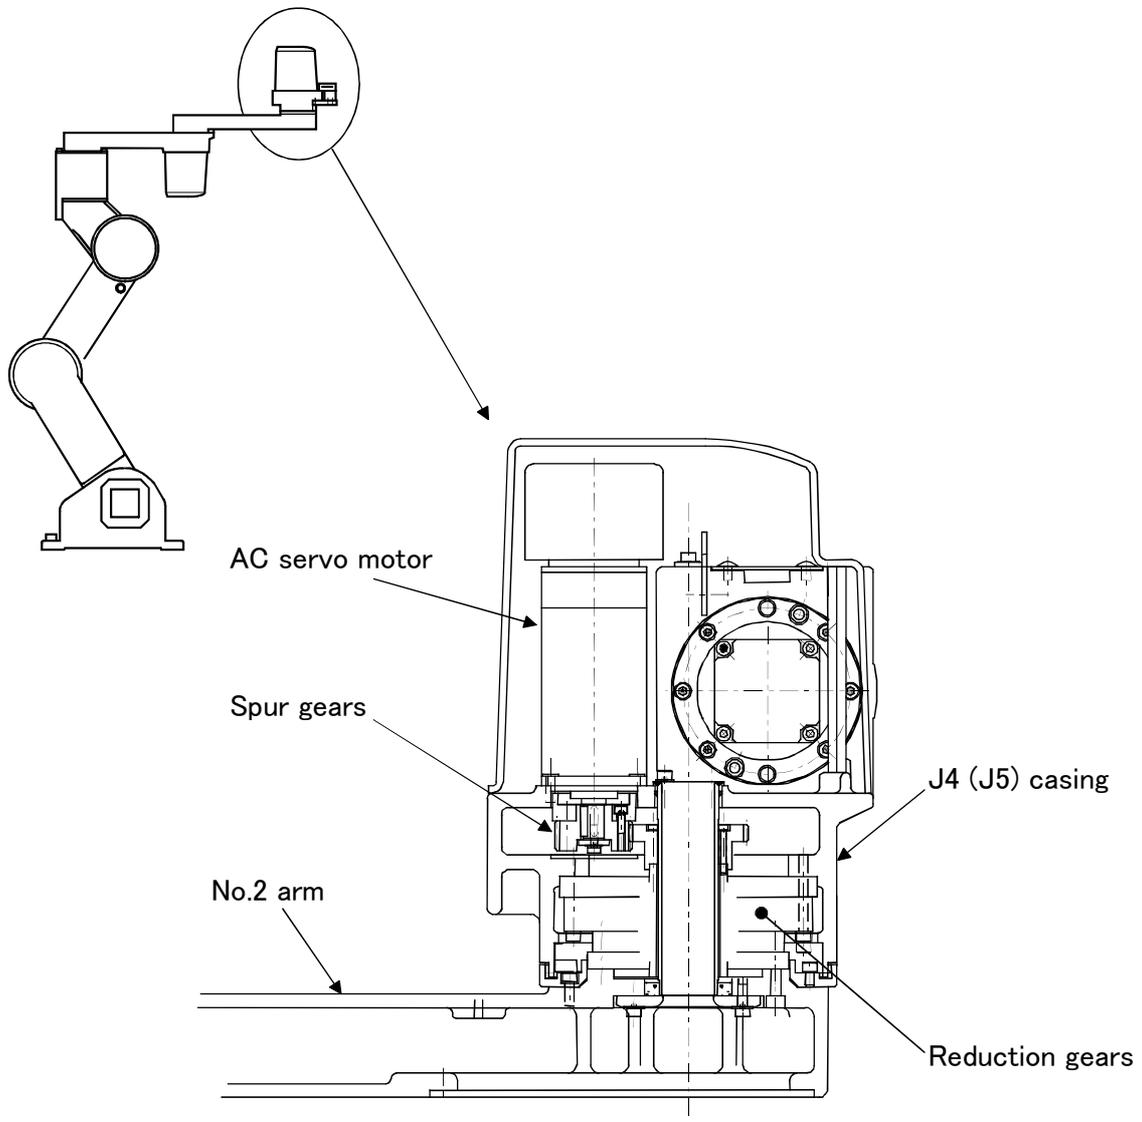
J4 axis drive mechanism (RH-1000GHLC-SA/GJLC-SA)
